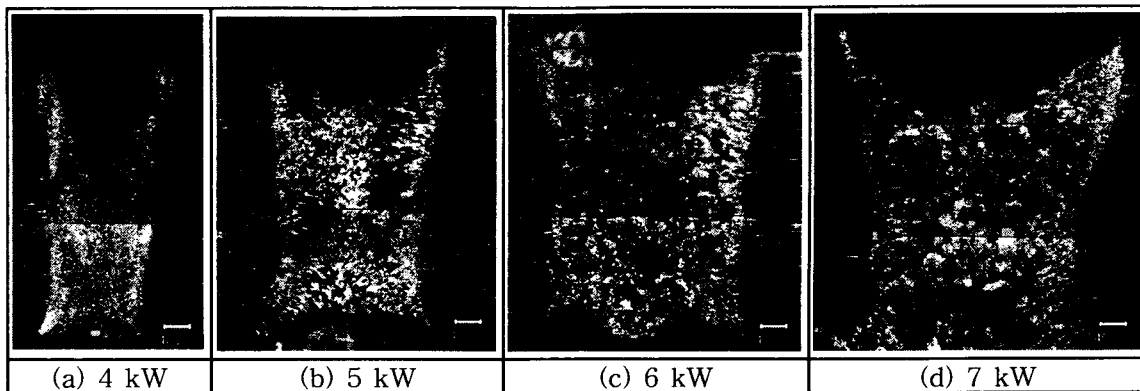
Macrostructures of bead of joints welded with laser power.
